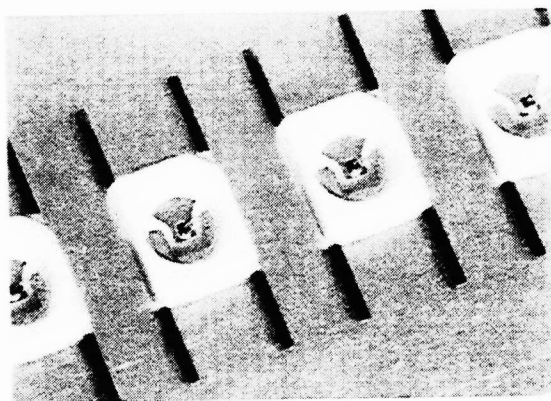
Premoulded SMD-LED upon reel after wire bonding.
